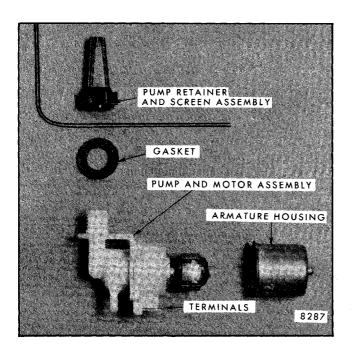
Jar Mounted Motor and Pump Assembly
